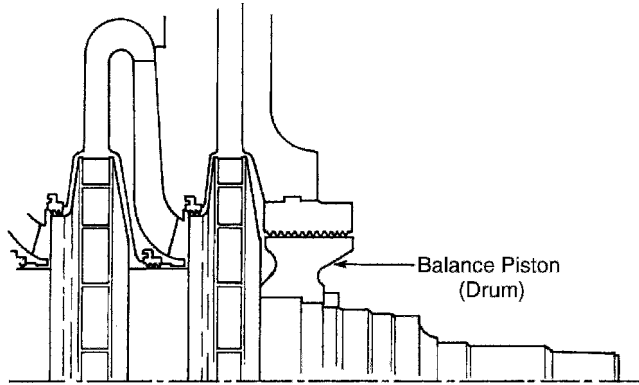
Balancing drum mounted behind a last-stage impeller. (*Dresser-Rand Company, Olean, N.Y.*)
